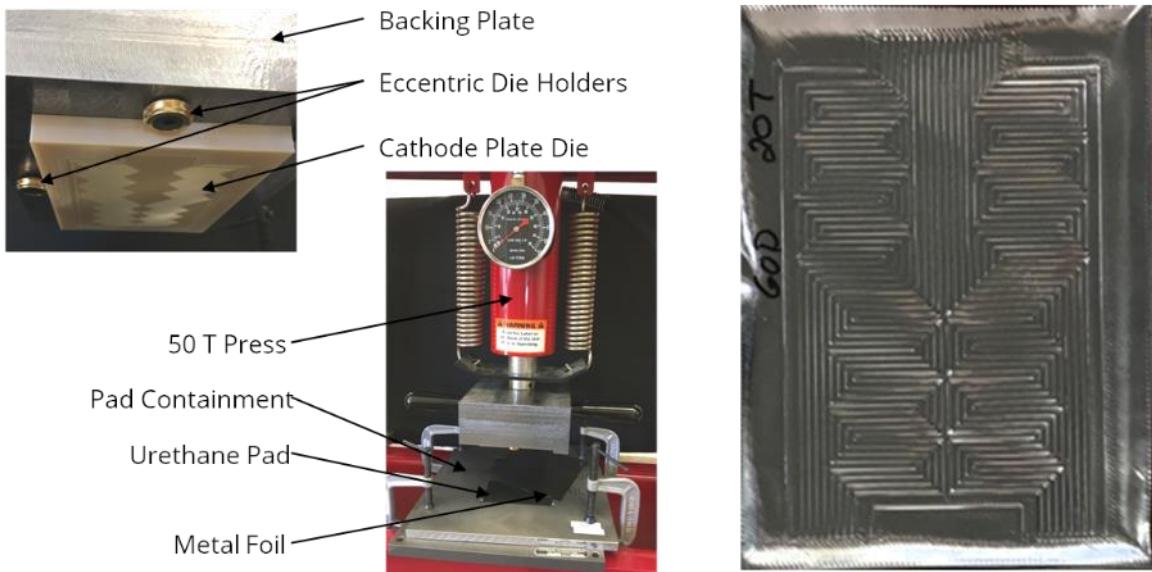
Go/No-Go Rubber Pad Press Test and Associated Formed Part
